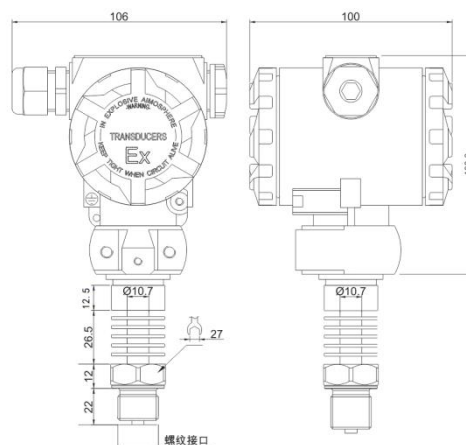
External dimensions of a high-temperature pressure transmitter (five heat sinks, unit: mm)
